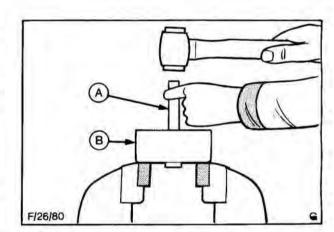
Removing commutator housing bush A – Suitably-sized mandrel B – Housing
